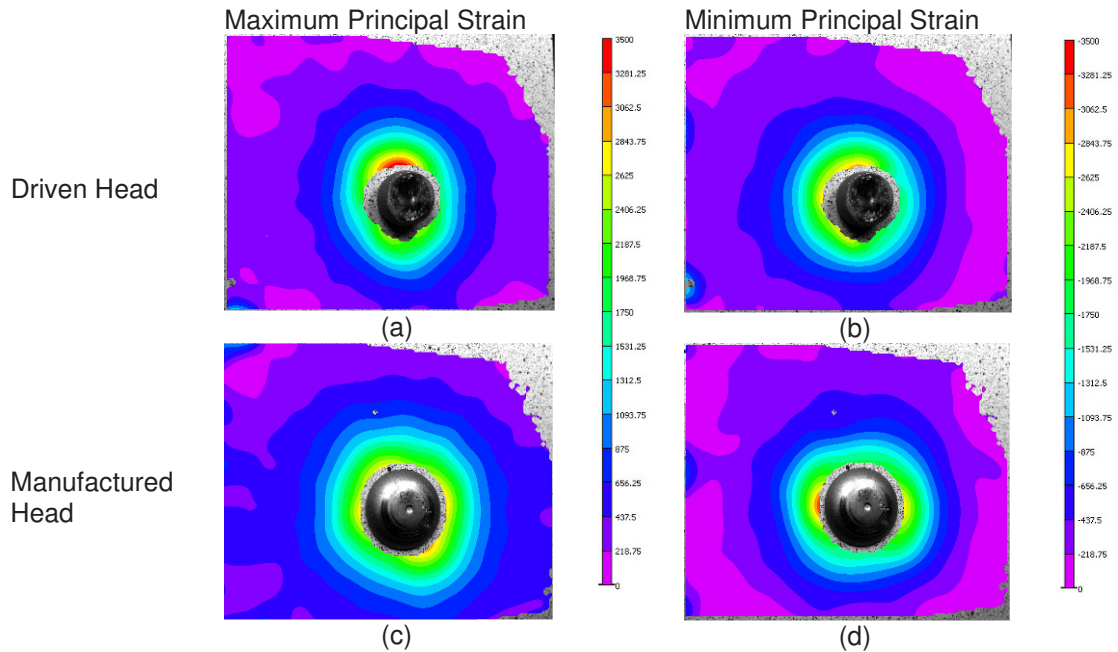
Riveting strains for FML 4 variant coupons on driven and manufactured head faces
